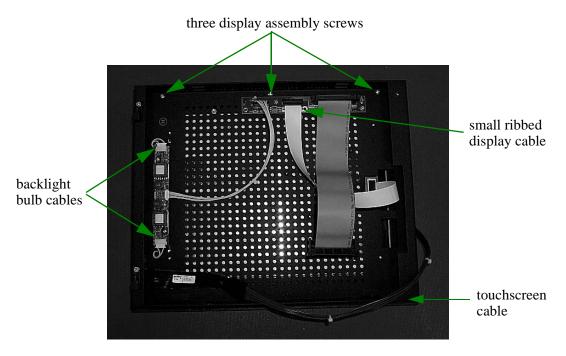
Philips (12" Unit) Display Assembly Cable Locations
